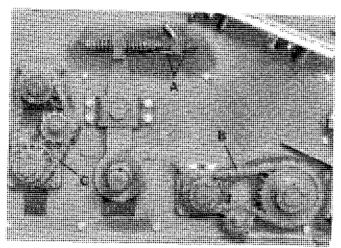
STARE ROLL DRIVE (Shield removed for clarity)
